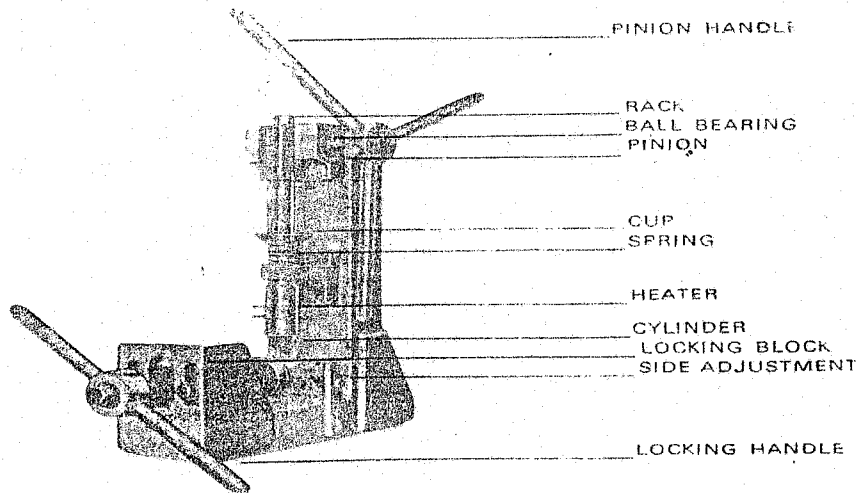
Hand operated injection moulding machine Vest, (2000).
